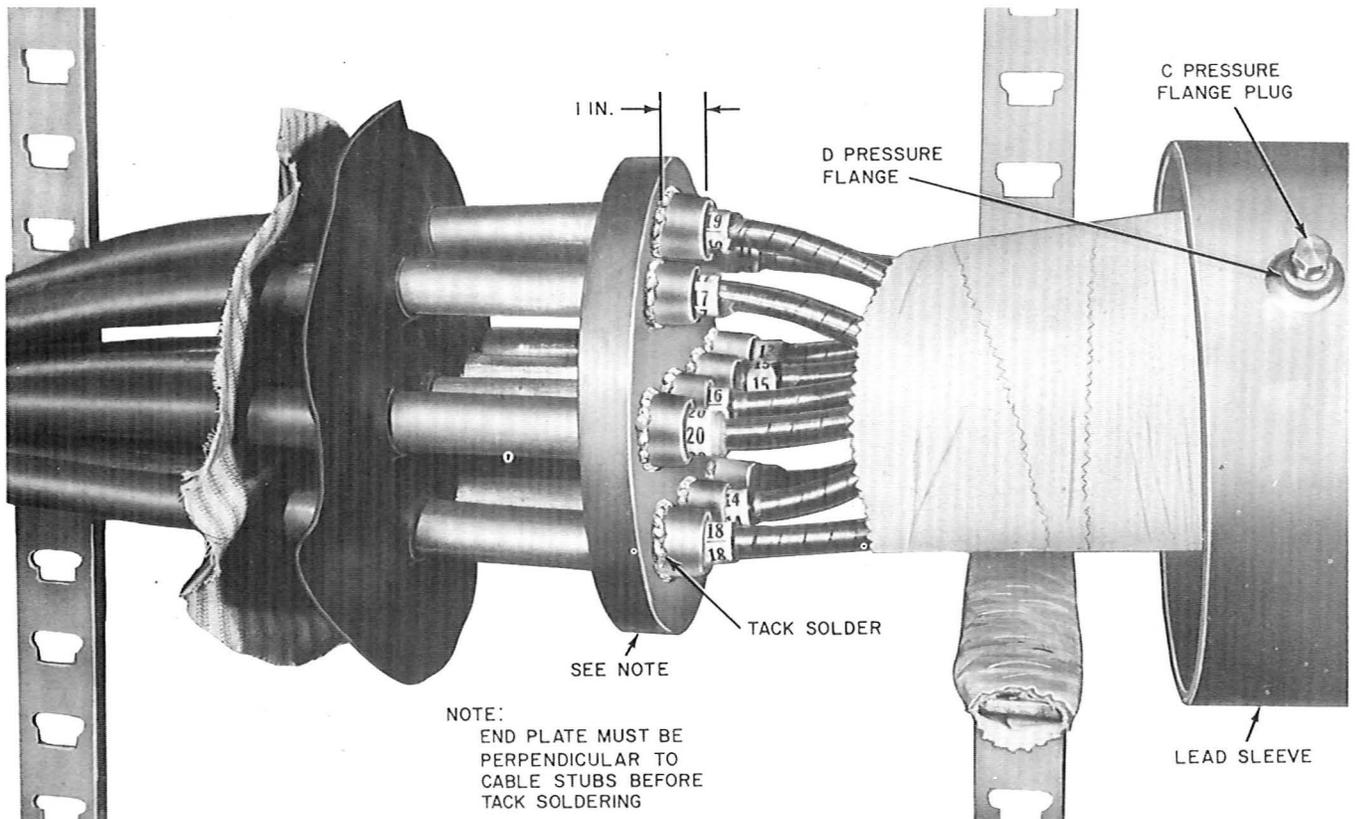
Cable Sheaths Tack-Soldered to End Plate
